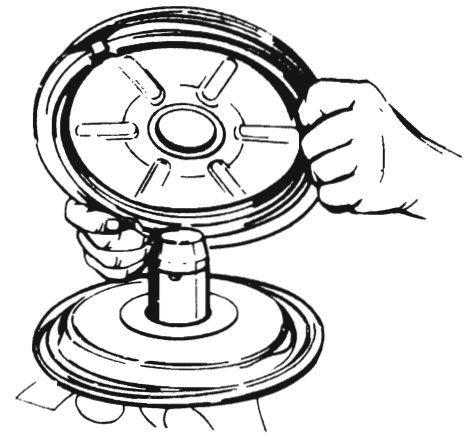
Positioning Housing Divider Over Secondary Bearing Protector Tool J-23188
